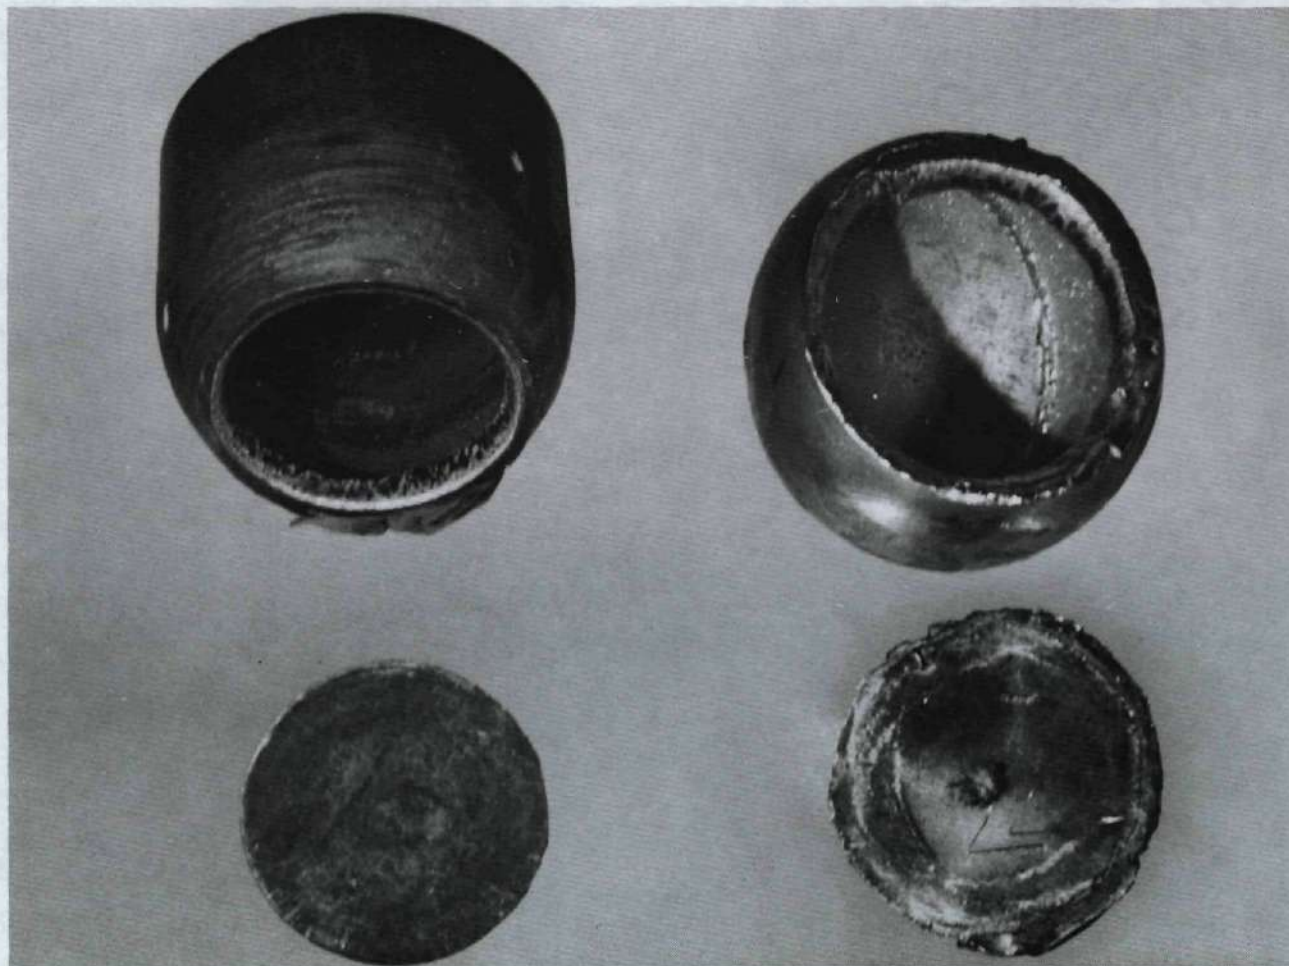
An Example of a Faulty Electron Beam Weld.
